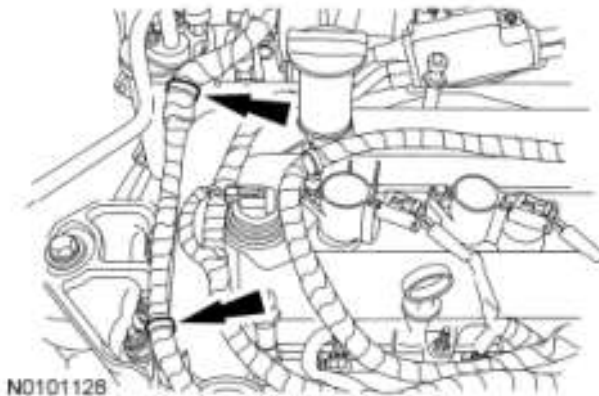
Locating High-Voltage Electrical System Wiring Retainers
